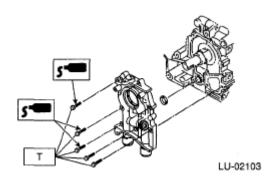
Applying Fluid Packing To Threads Of Bolts Courtesy of SUBARU OF AMERICA, INC.
